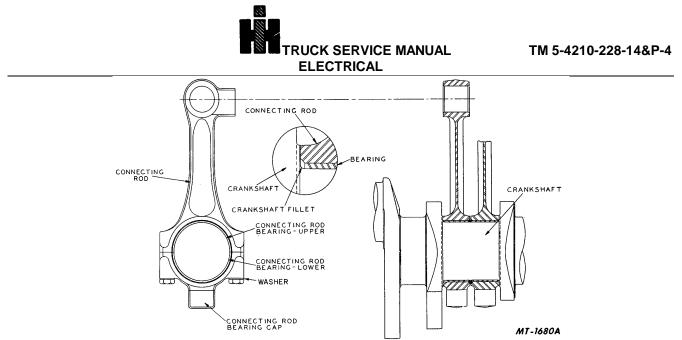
Illustrating Proper Installation of Connecting Rod to Crankshaft.
